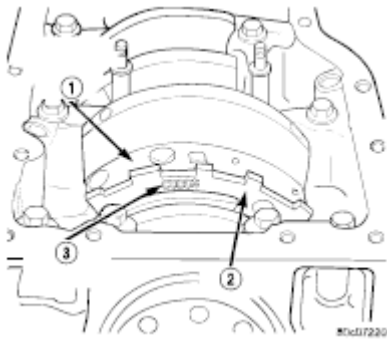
Identifying Crankshaft Position Sensor Target Wheel And Counter Weight
